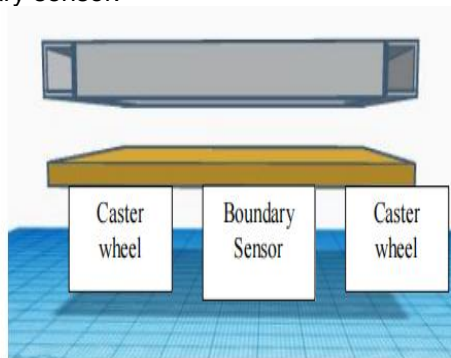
(A). Side view of the automatic solar grass trimmer.
